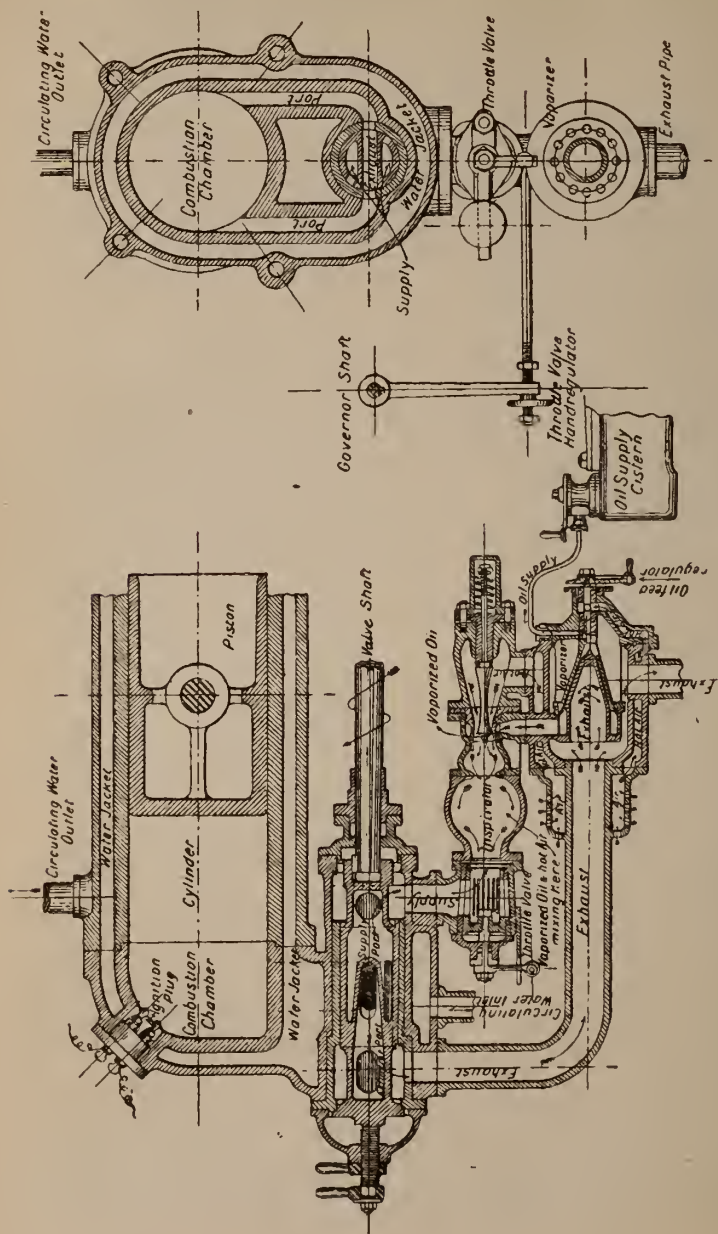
Section showing arrangements of parts of Clarke, Chapman & Co.'s Oil Engine.
